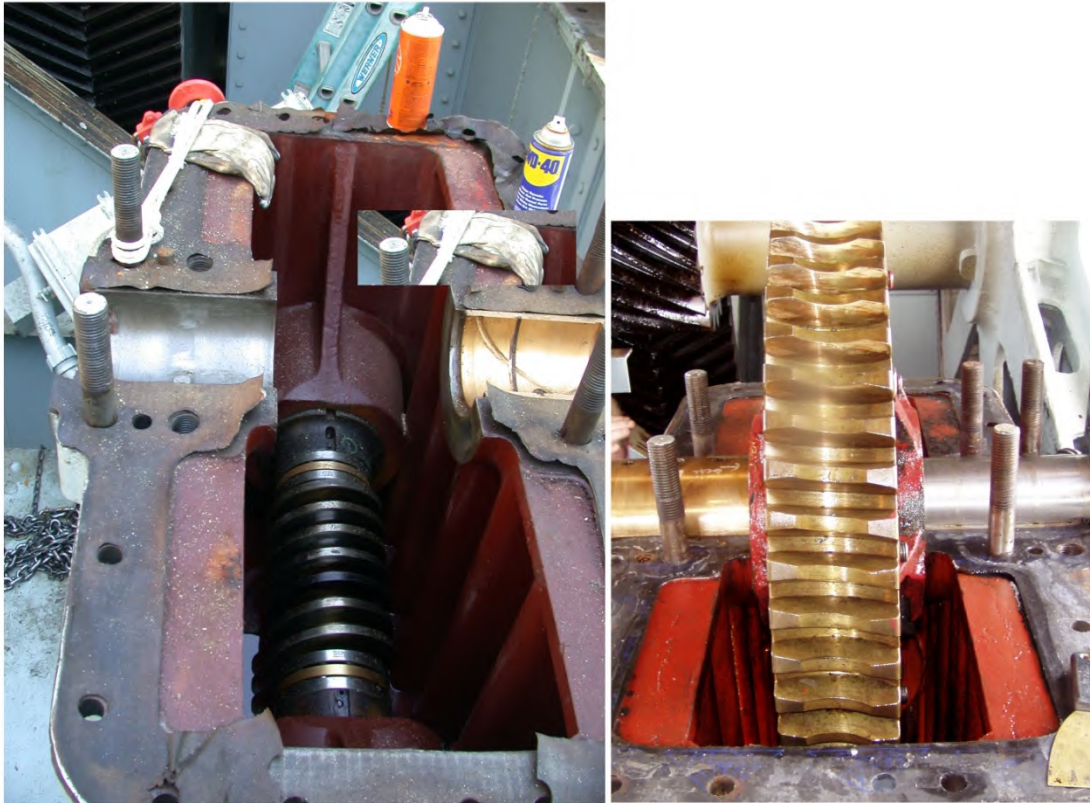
Worm Gear Reducer with Worm Wheel Removed (Left) and in Place (Right).
